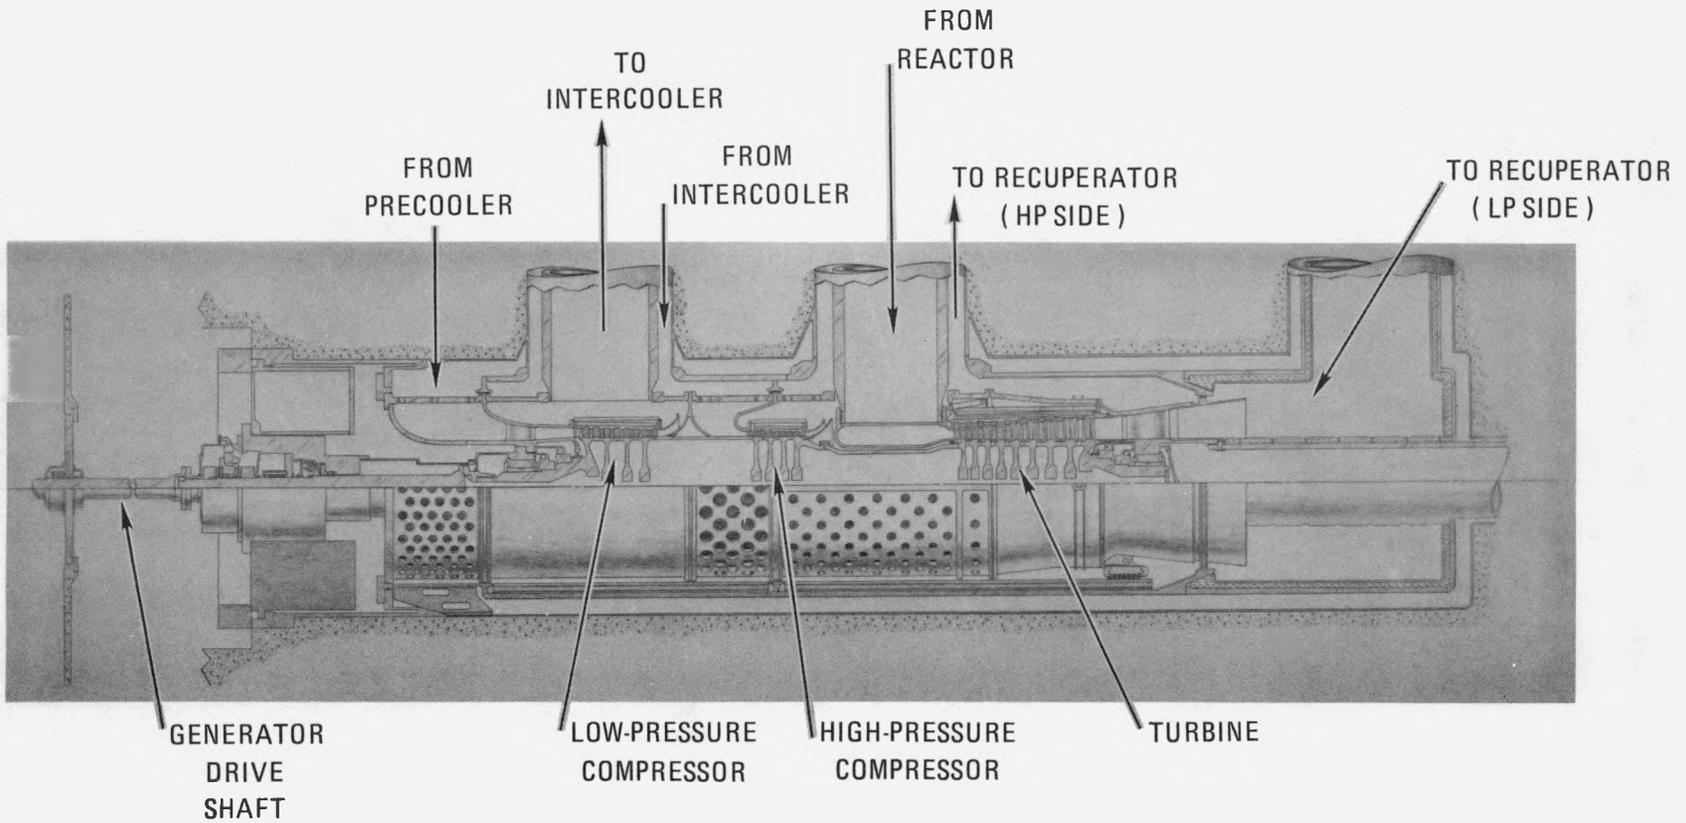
Warm liner configuration for 620-MW(e) turbomachine
